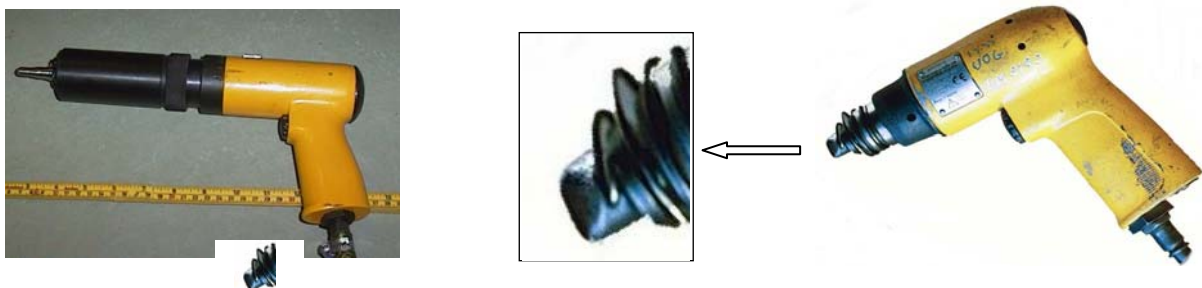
Pneumatic riveting guns used for hammer peening.
